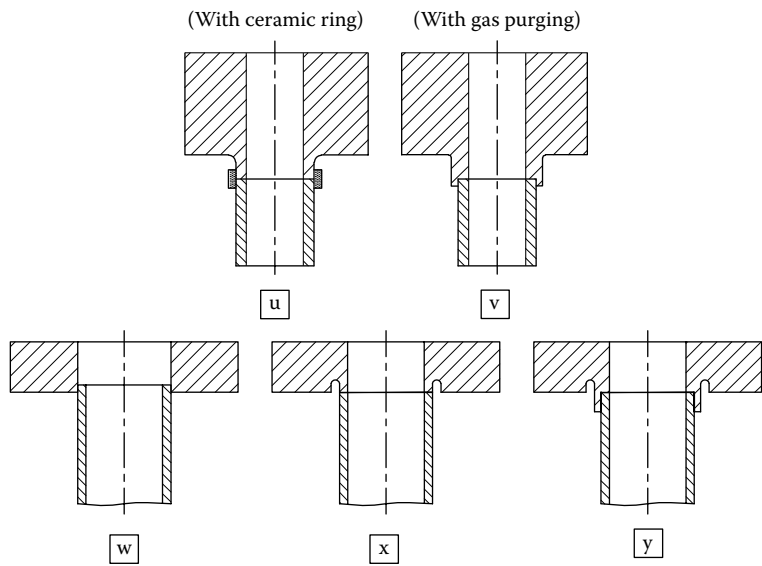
Tube-to-tubesheet joint configuration for internal bore welding behind the tubesheet. (Courtesy of Polysoude S.A.S, Nantes, France.)
